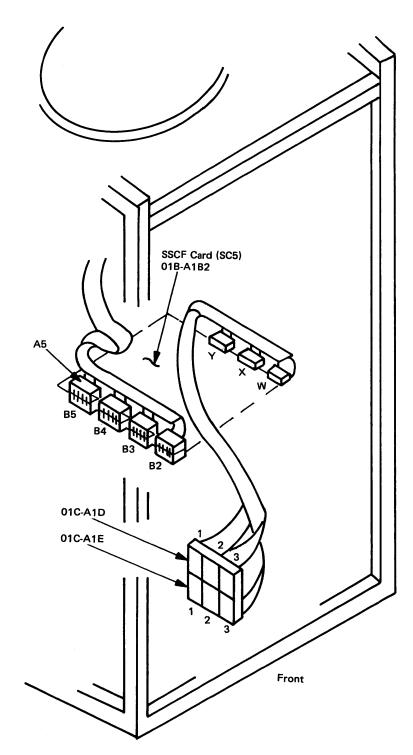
8809 Model 1B SSCF Card and Cable Positions
